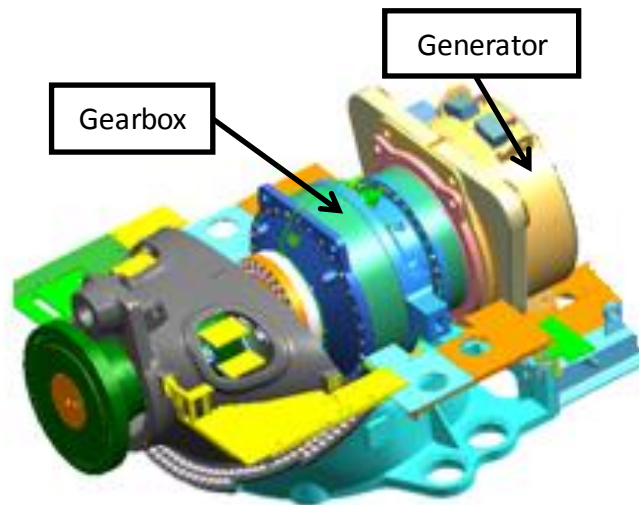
3-D Model of CGDT Gearbox with Generator
